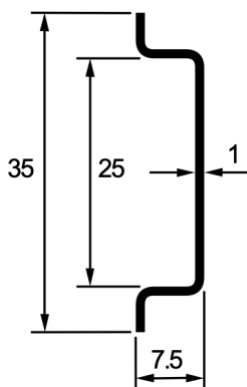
Recommended Din-Rails (EN 50022) Dimensions
